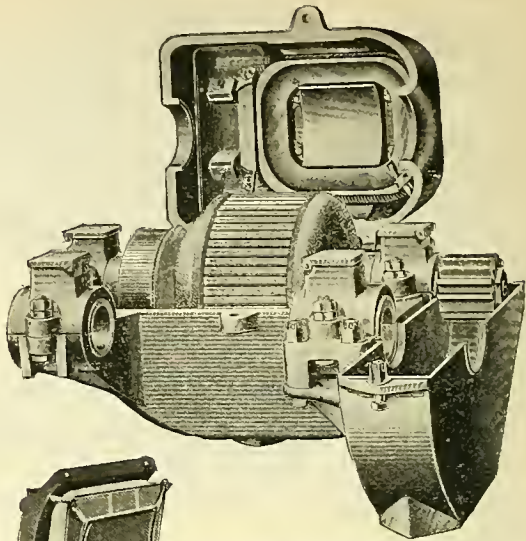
MOTOR-CASE AND ATTACHMENT TO AXLE.
